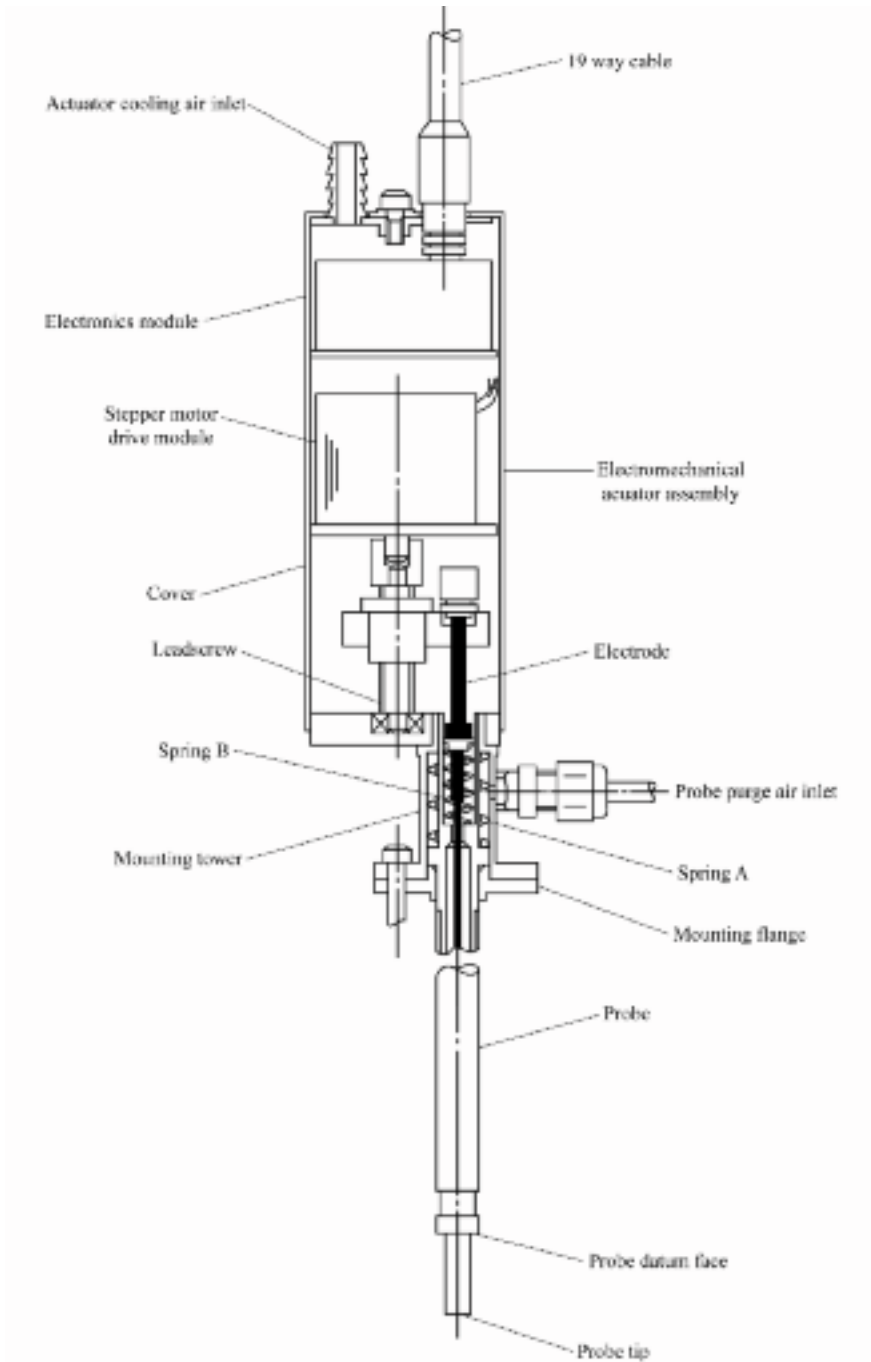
The mini electromechanical clearance measurement system actuator design, with a probe cartridge shown for clarity.
